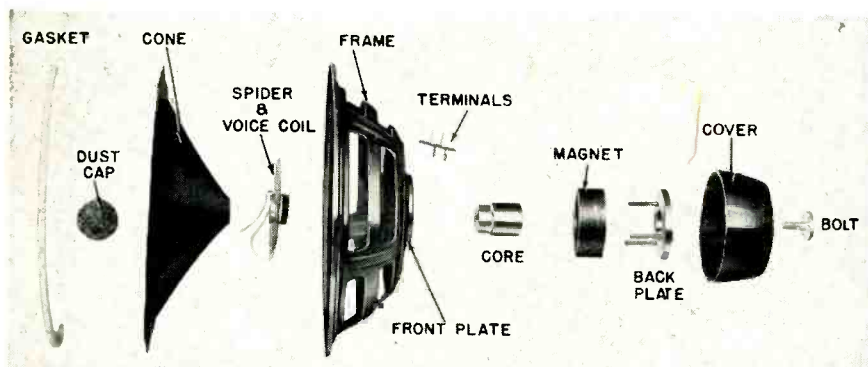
This photograph is an exploded view of the speaker shown in Fig. 2, with all the parts shown in position to fit together when a giant hand (equipped with the proper tools) accords them together. This figure makes clear the exact shapes of some parts—the field magnet, for example, which is obviously cylindrical. The spider-voice coil assembly picture is especially useful, since it shows how the coil form is supported fairly rigidly, yet can move axially.
